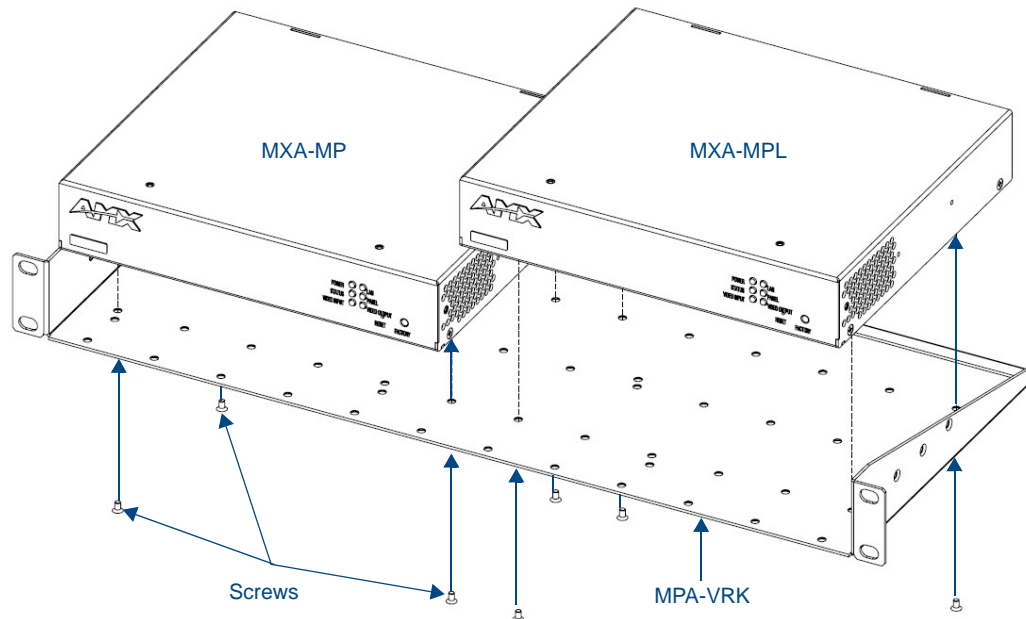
Installing two MXA-MP devices in a Rack Mounting Tray
